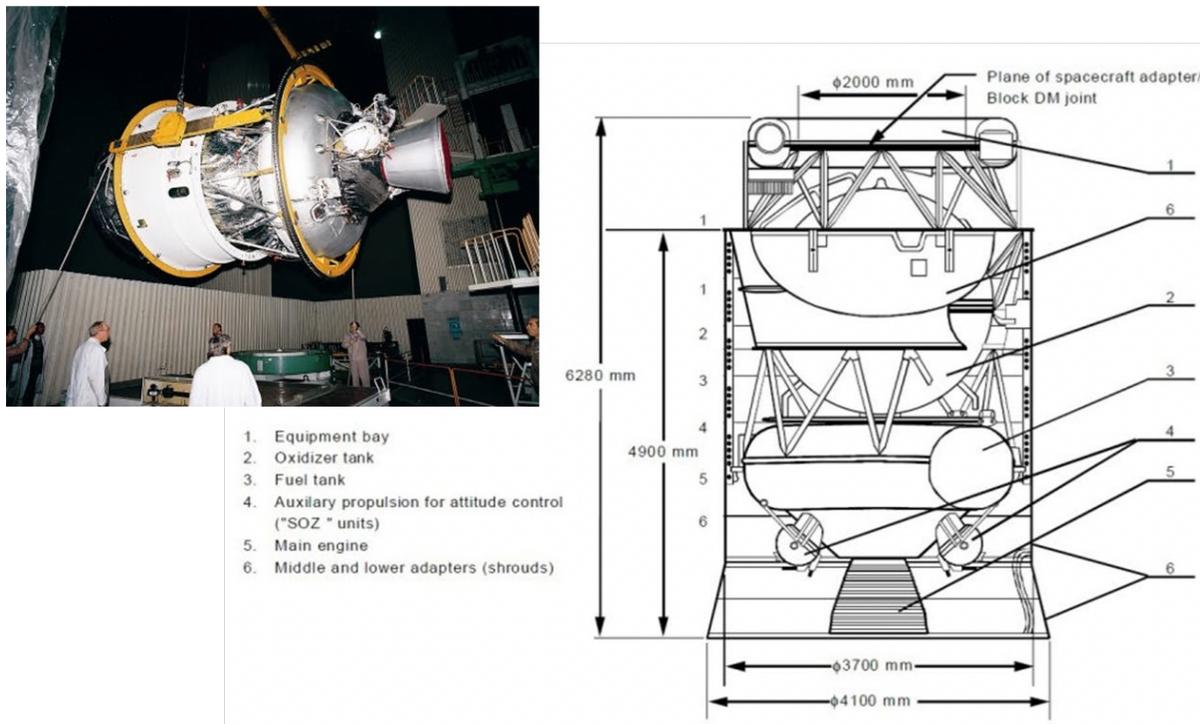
Photograph and line drawing of the SL-12 fourth stage rocket body.
